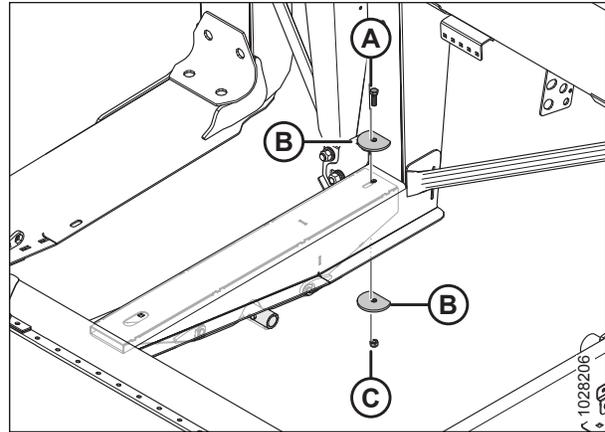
Inboard Arm Assembly Installed in Left Header Leg – View from Below
